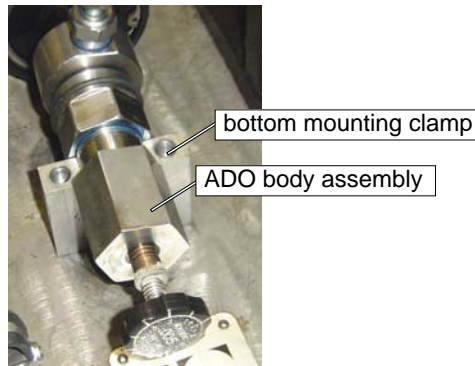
Place the Body Assembly into the Bottom Mounting Clamp
